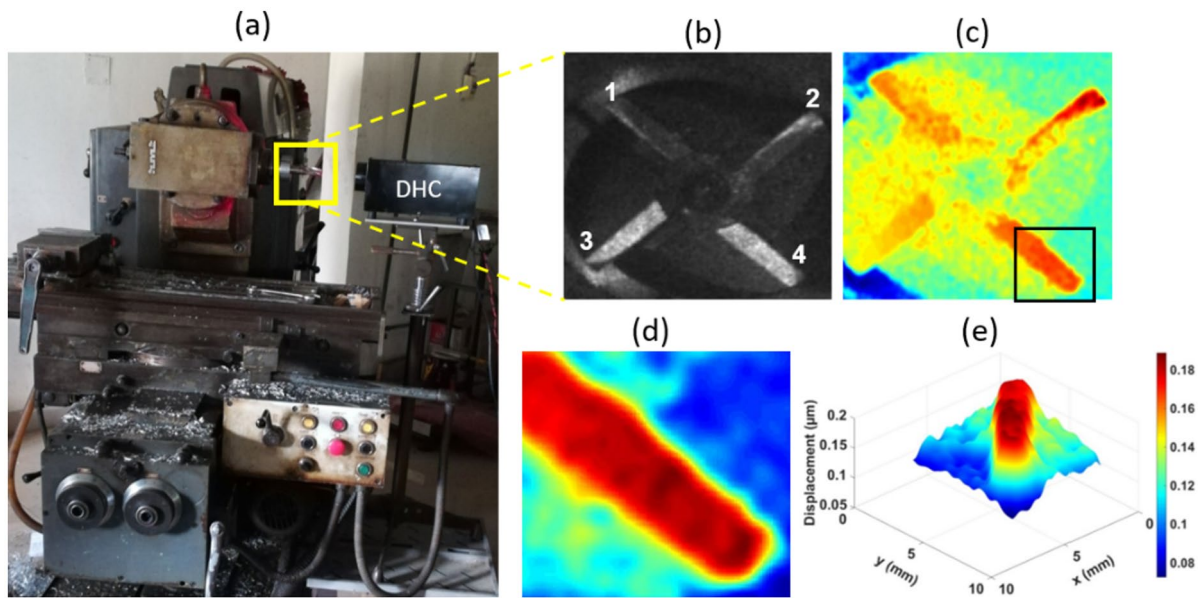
a Photograph of on-machine inspection of end mill tool fixed on a vertical milling machine using DHC, b amplitude distribution of end mill tool indicated in rectangular box in a, c unwrapped phase
